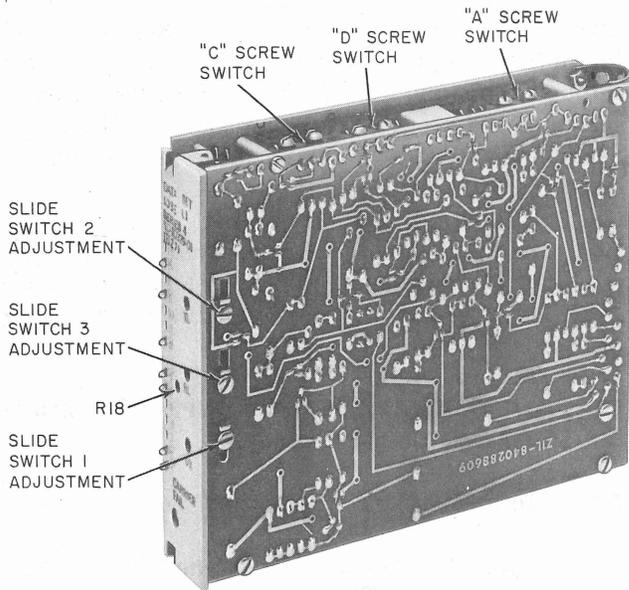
Data Set 108E-Type—Location of Test Points and Screw Switches
